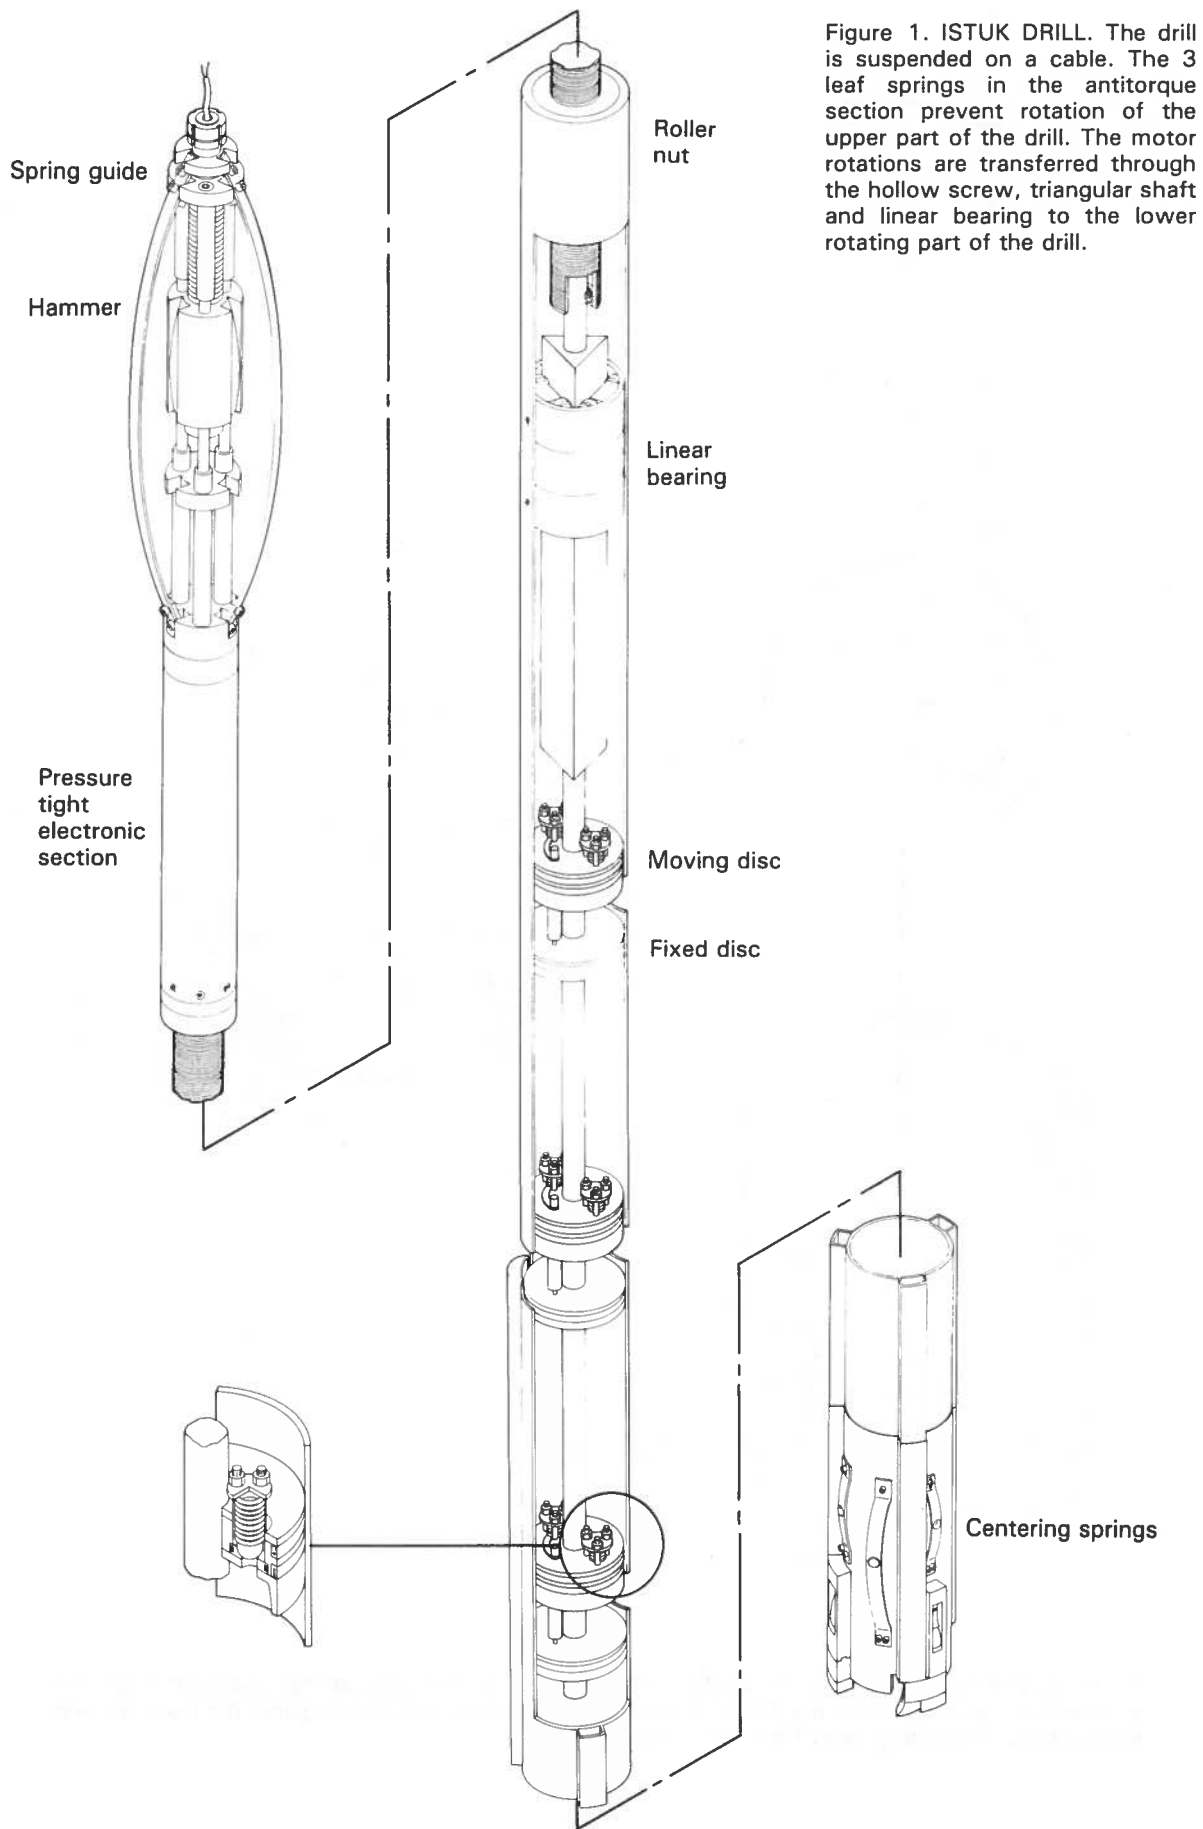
ISTUK DRILL. The drill is suspended on a cable. The 3 leaf springs in the antitorque section prevent rotation of the upper part of the drill. The motor rotations are transferred through the hollow screw, triangular shaft and linear bearing to the lower rotating part of the drill.
